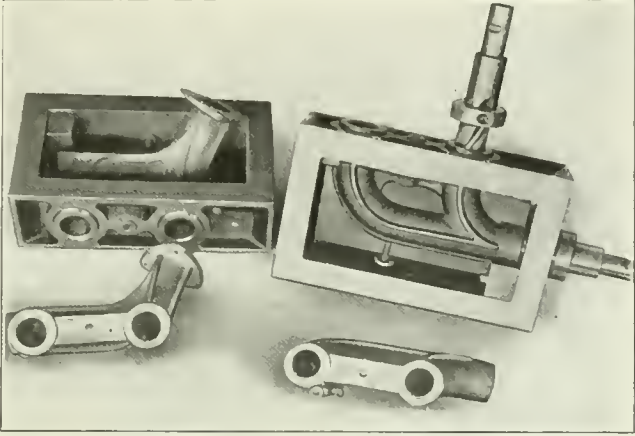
Drilling Jigs for Two Different Shapes of Exhaust Manifolds
